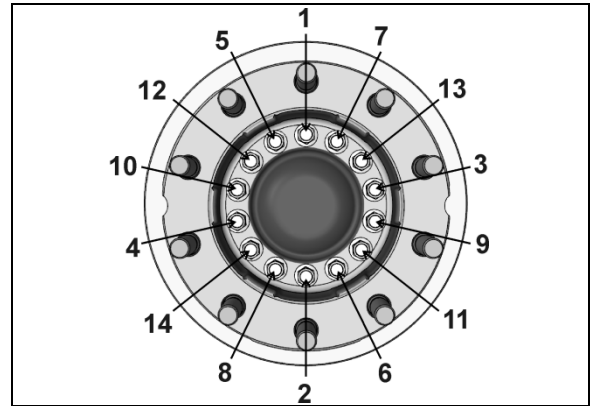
HUB FLANGE HEX CAP SCREW TIGHTENING SEQUENCE
